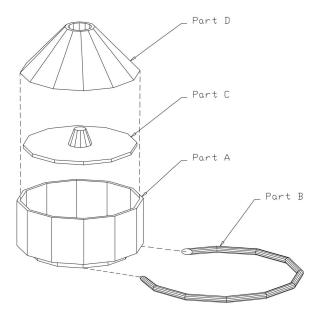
Small Snap and Insert Assembly Containing Four Plastic Parts [Quinn 1997].
